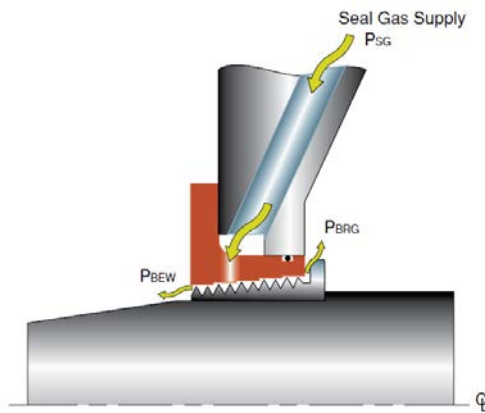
Labyrinth Seal for Oil Lubricated Bearings
